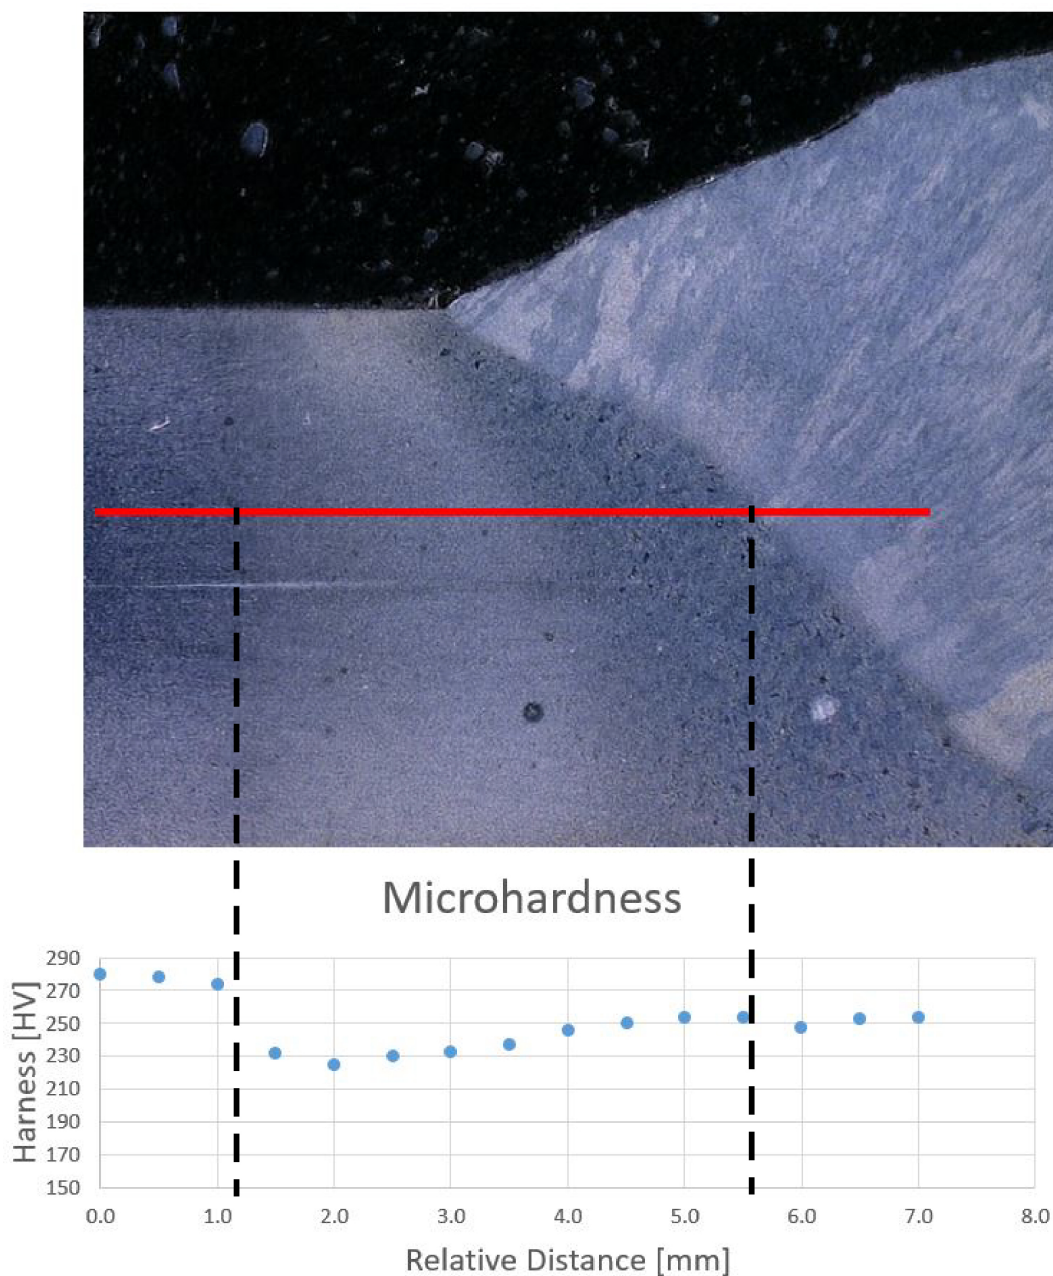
Cross-section single weld with Hardness measurement points.
